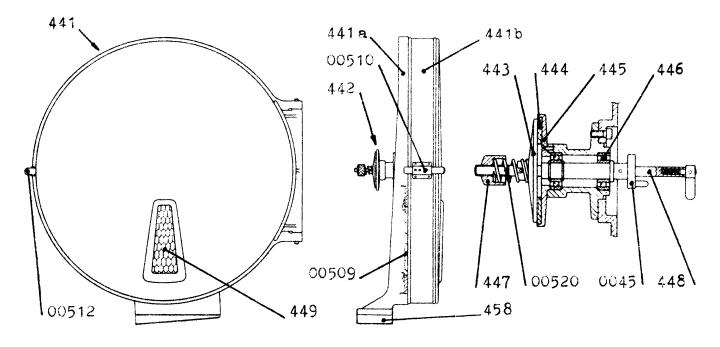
AUXILIARY UPPER SPOOL DISC AND COVER
